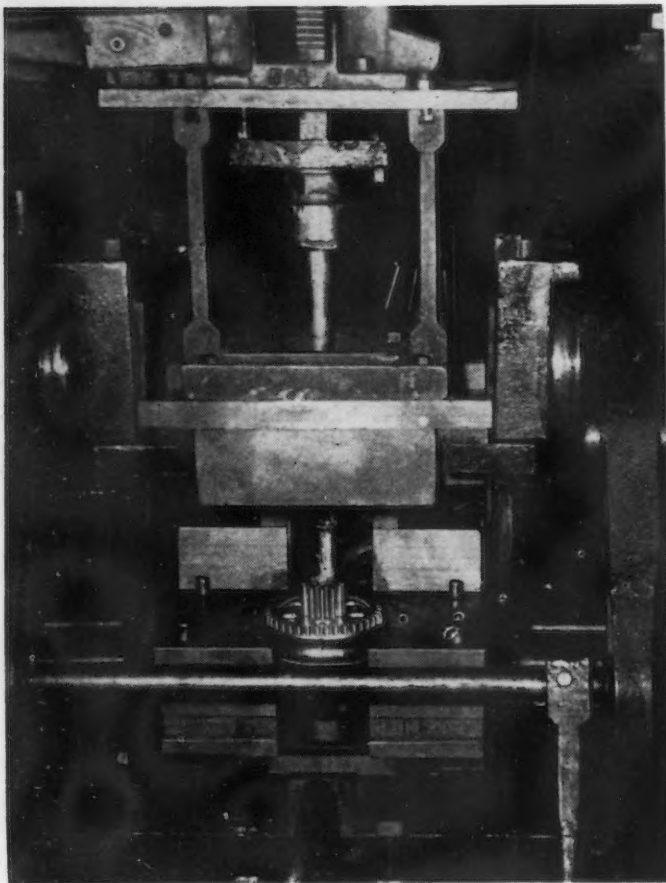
After casting, dies are opened, and the casting is ready for ejection when core has been pulled and top die raised. The upper die contains the cavities forming the gear.
